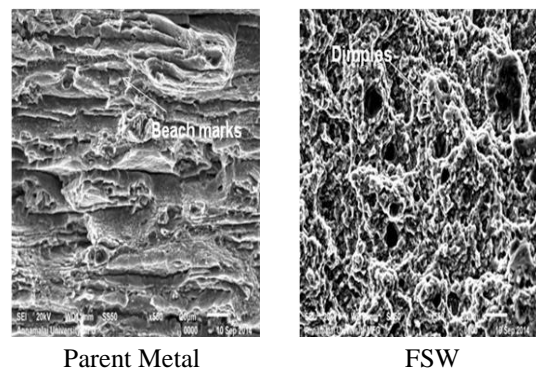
Fracture surface of Parent and FSW joints
